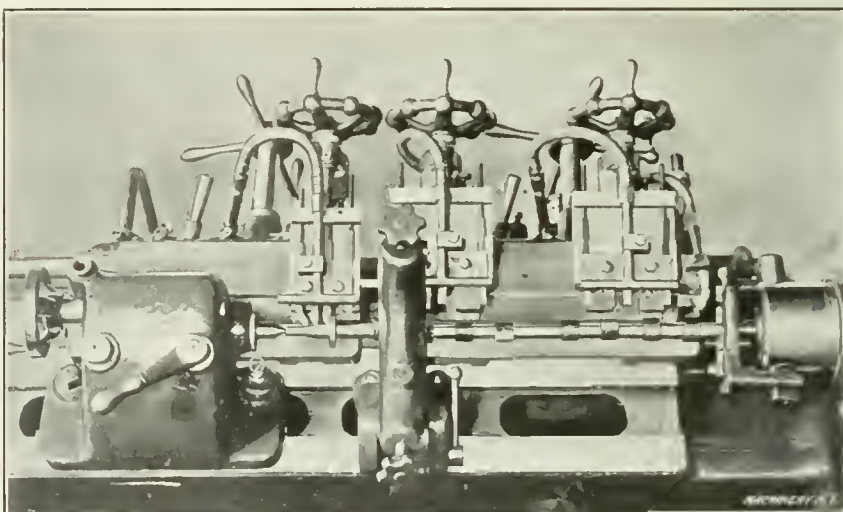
Arrangement of Tools for the Second Operation on the Camshafts
